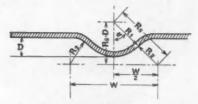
Section through stiffening bead by plane perpendicular to the lengthwise axis
